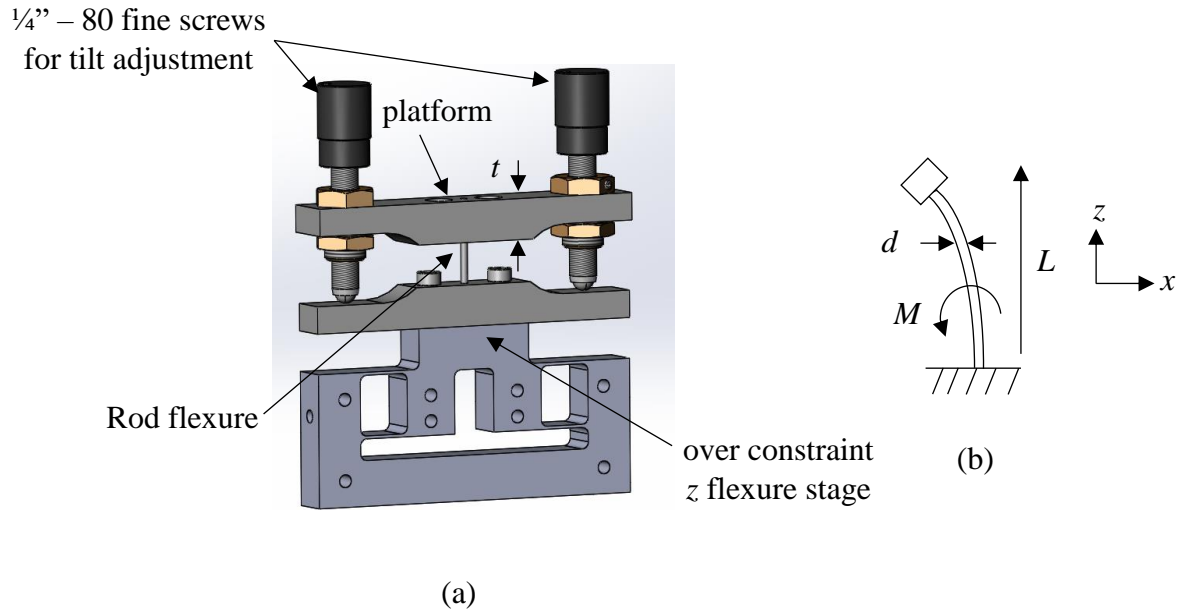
A rod flexure mechanism used to remove the tilt of the sample surface measured using the Fiber Fabry-Perot interferometric profiler
